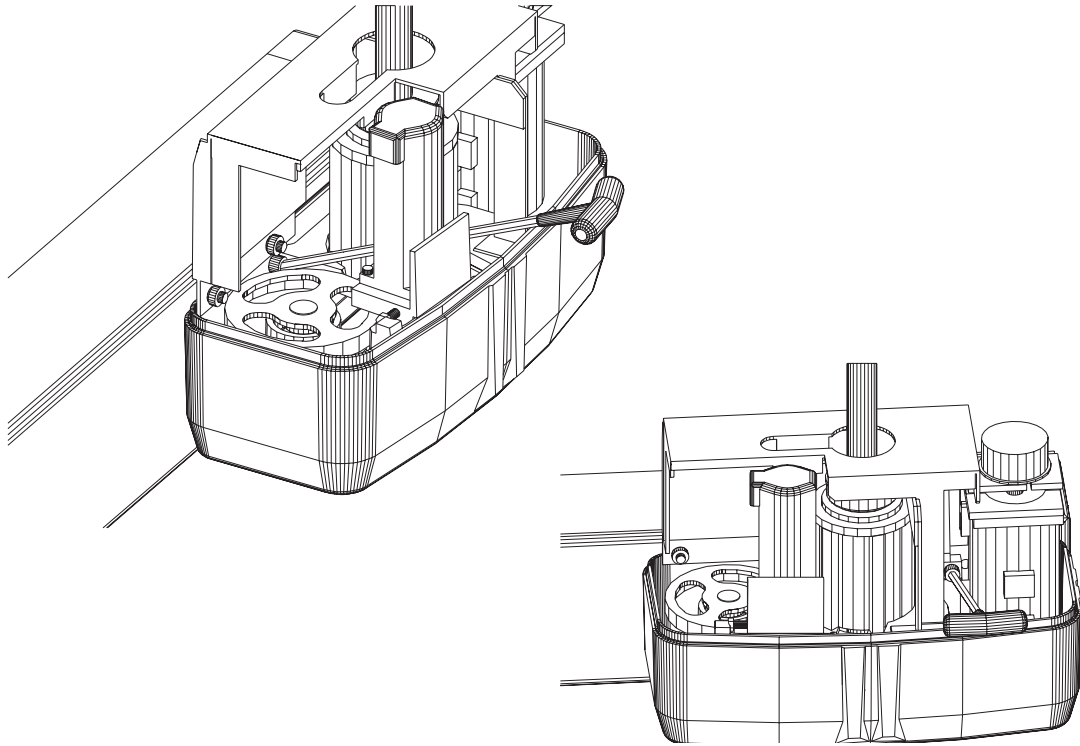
Z-Theta Mounting, Top Left, and Right Screws with Top Cover Removed
